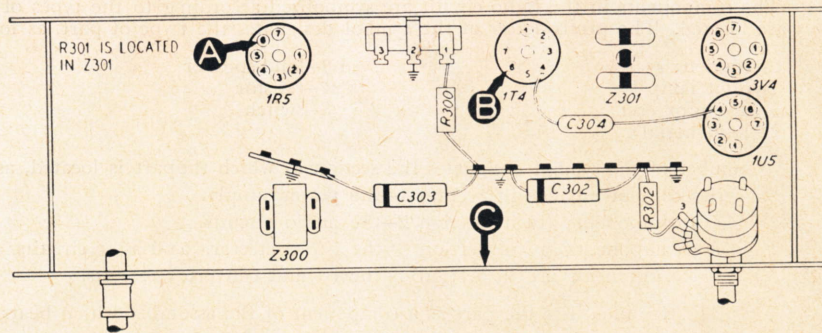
Bottom View, Showing Section 3 Test Points TP-5354C
